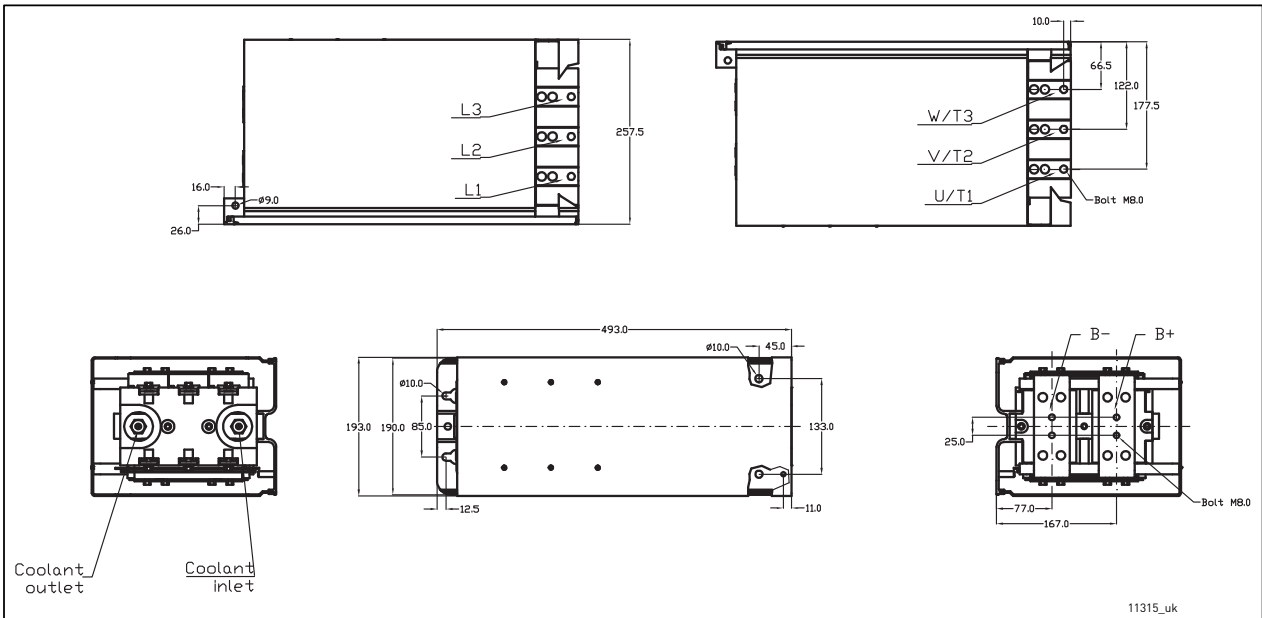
VACON® NX Liquid-cooled drive dimensions (AC drive), CH4
